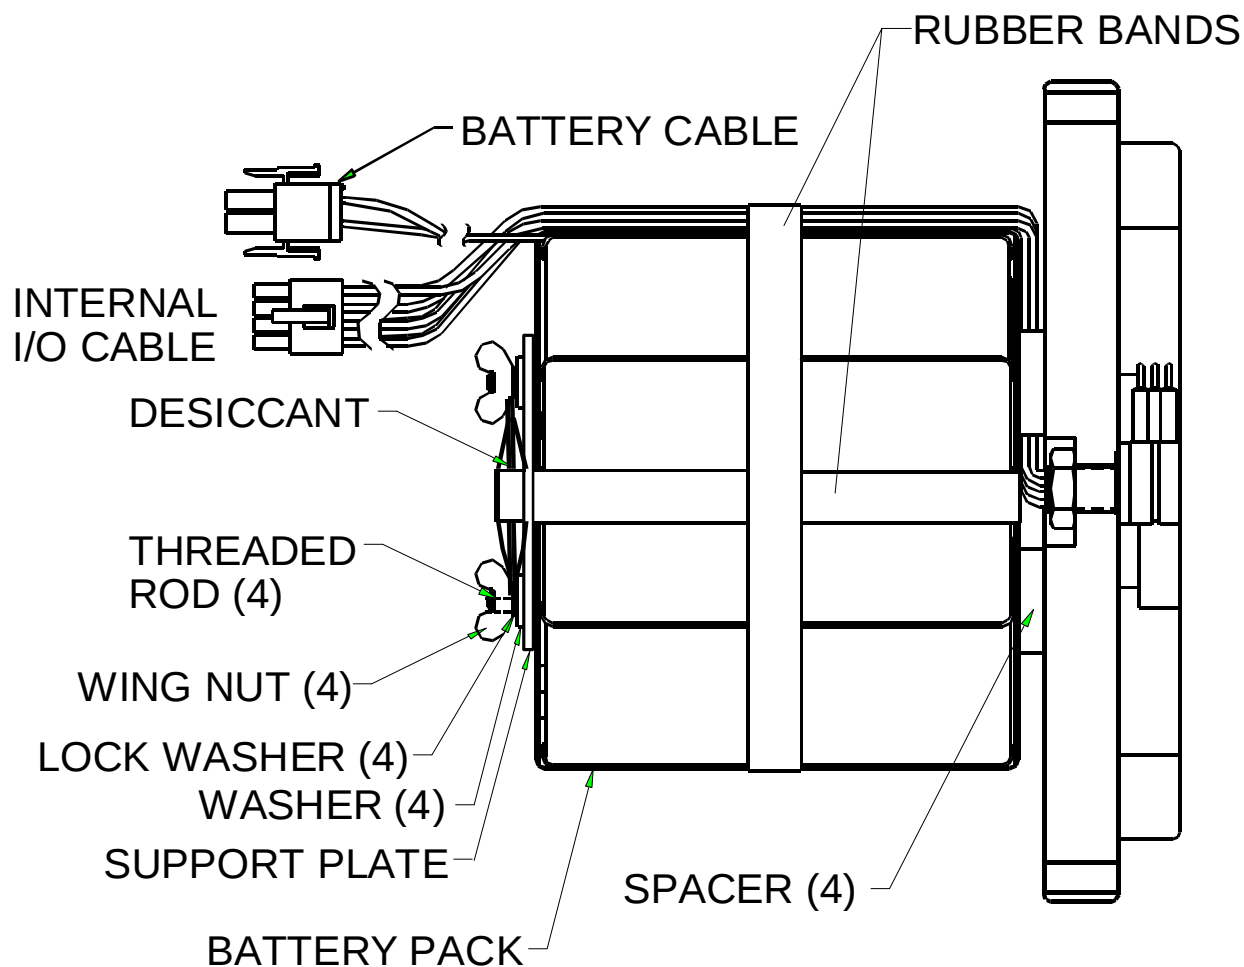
Sentinel End-cap and Battery Pack Parts Location
